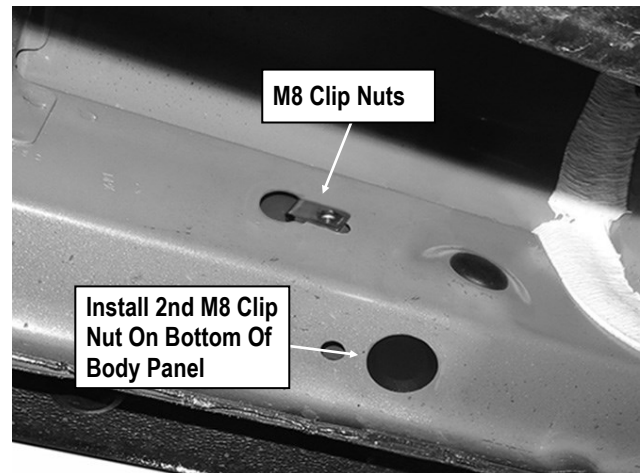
Passenger Side Mounting Locations Along Bottom And Back Of Body Panel Illustrated
